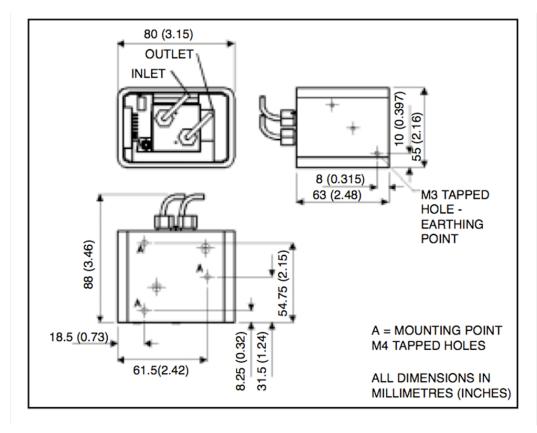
Layout & Dimensions of the O₂ Sensor
